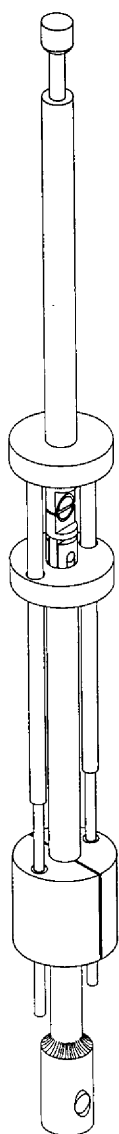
Fixture for tensile testing rings from TeGen fuel pins.
